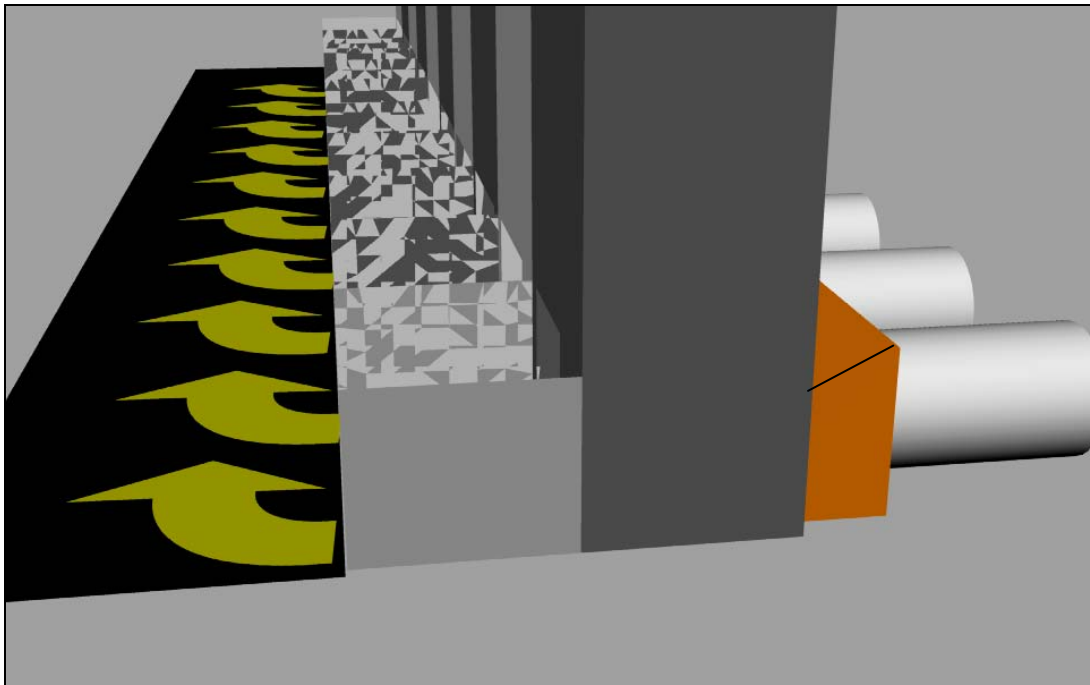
This figure shows the angled pushrod that would push the piece of cargo out of the vertical dispenser. The pushrod is shown in orange.
